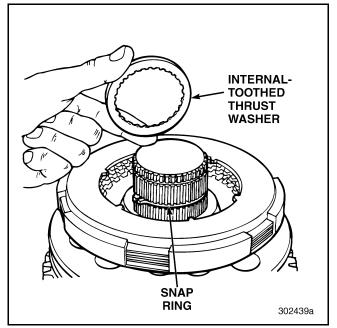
Removing Internal-Toothed Thrust Washer and Snap Ring (T313L21/T318L21 Shown)
